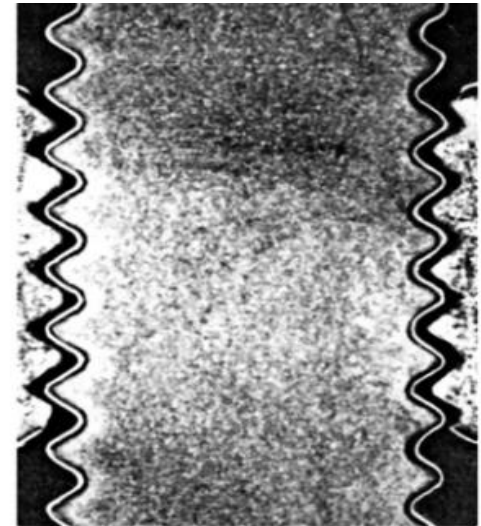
Hot-dip galvanized fastener system. Note absence of coating on nut thread.¹
